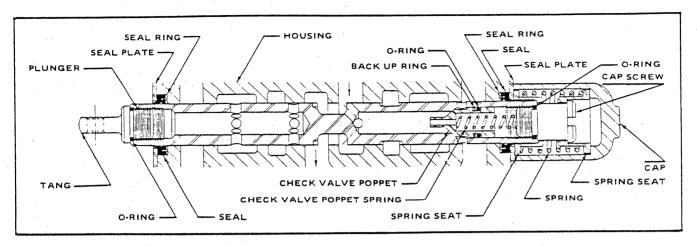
(cont.) Double Acting Series - Spring Centered Plunger (Hydraulically Balanced)
